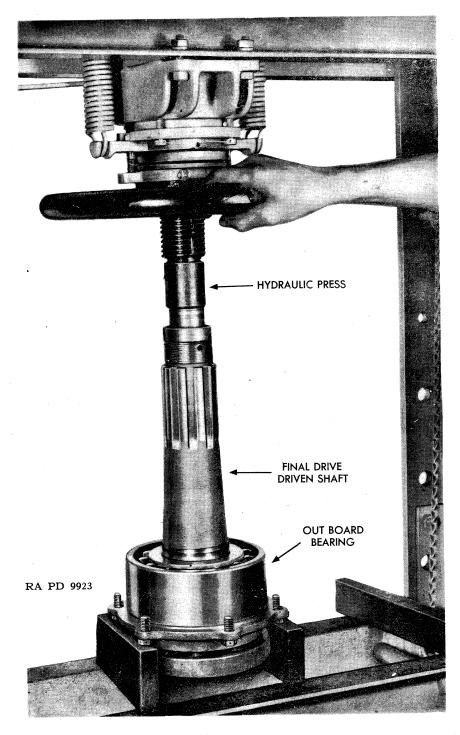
Removal of outboard bearing-final drive driven shaft.
